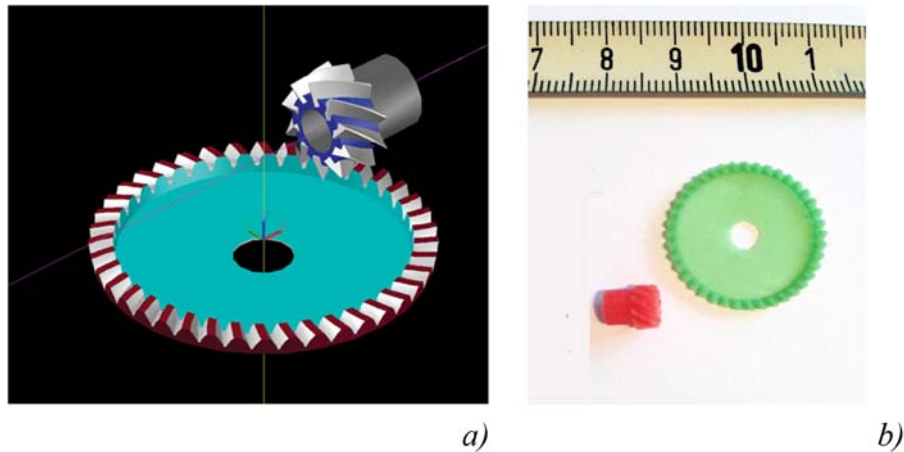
Spiroid gear drive with offset 4 mm, gear ratio 40/10 (axial module 0.5 mm): a) 3D CAD model; b) 3D printed model (the shown scale is in mm)
